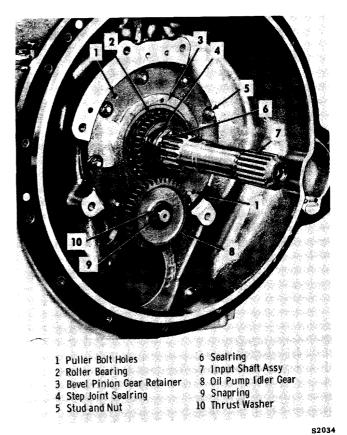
Input shaft and bevel pinion gear bearing retainer, installed (VS2 series)
